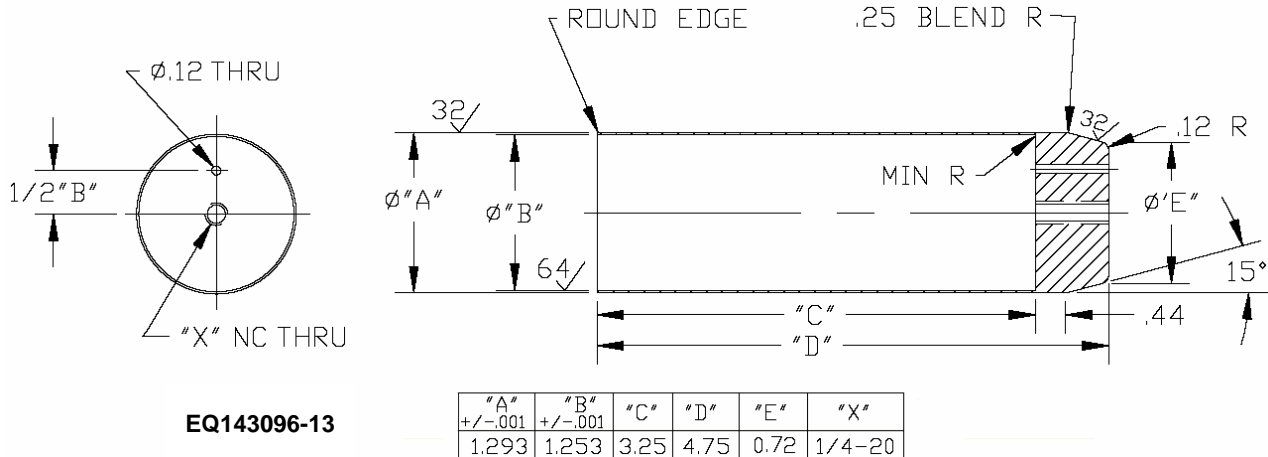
SEAL PROTECTION SLEEVE
